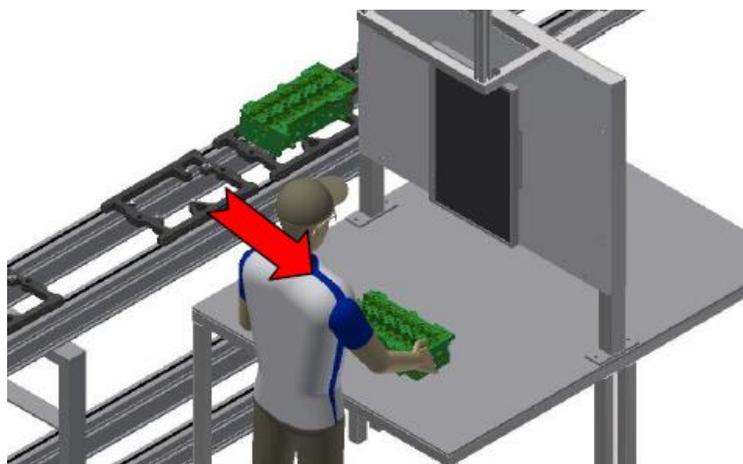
Final control on the machining line for the Diesel engine's lower cylinder head: The operator's desk
